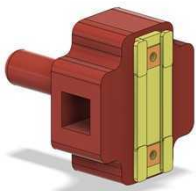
Passive Side Conveyor Holder: IGUS rail link and hole for MAKERBEAM to connect to the Lift
